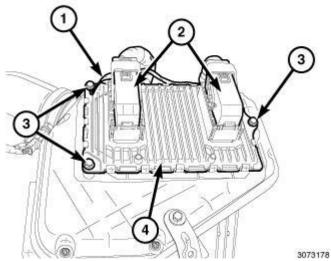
Electrical Connectors, PCM, Three Mounting Bolts & Ground Wire Courtesy of CHRYSLER GROUP, LLC
